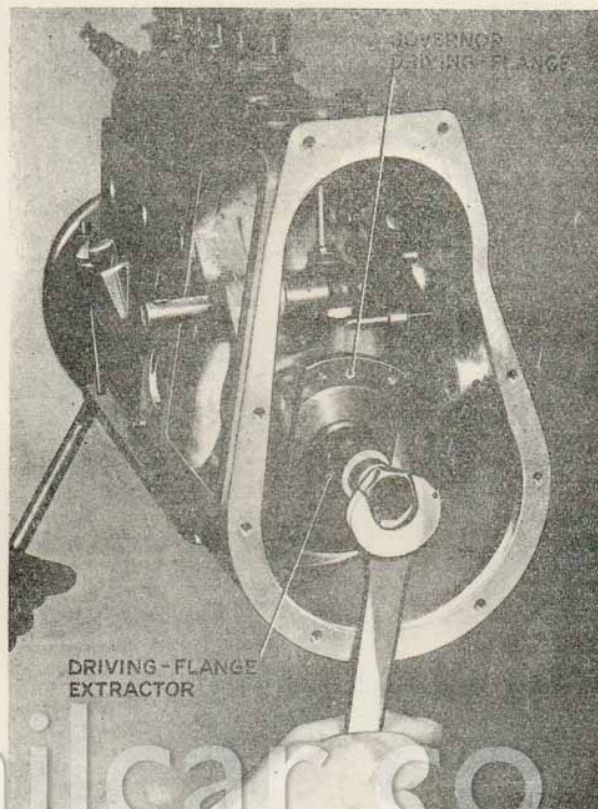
REMOVING GOVERNOR DRIVING FLANGE.
